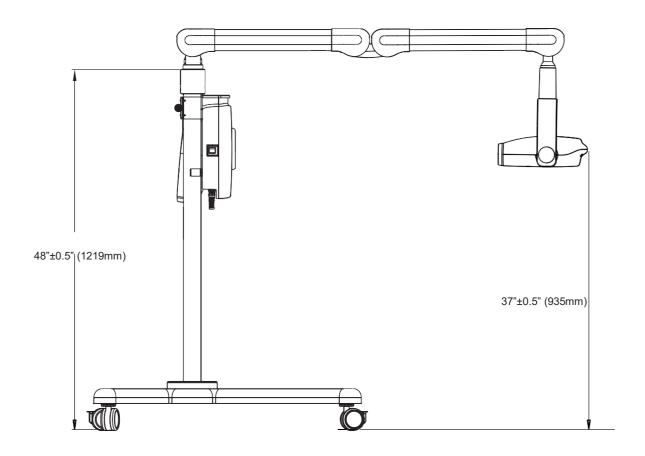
Floor Mount ImageScan HD Extended Dimensions
